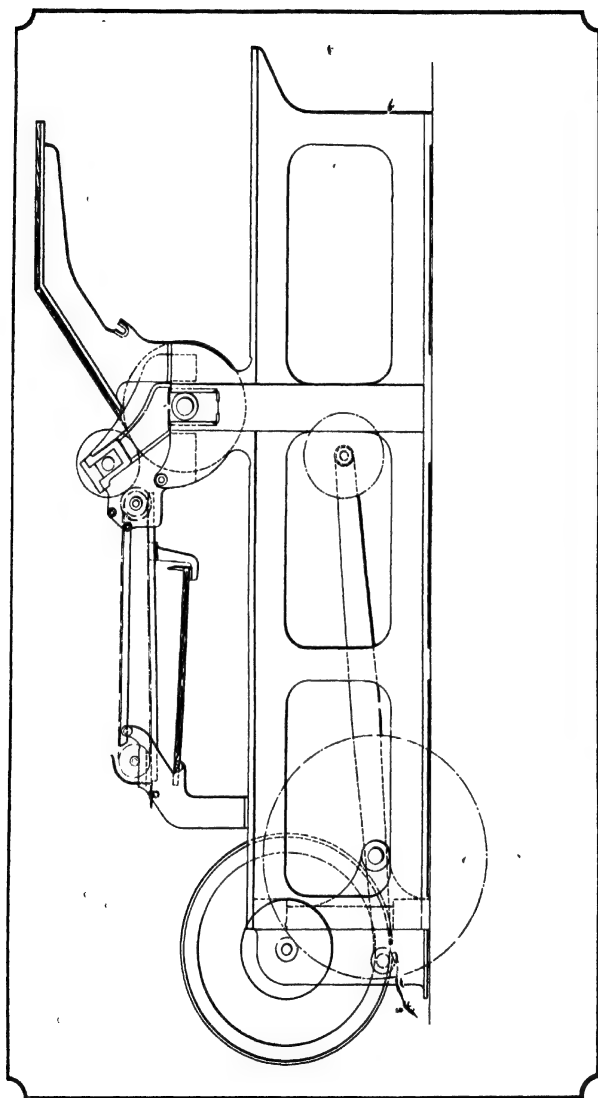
Flat-bed Offset Machine : Feeder's Side Elevation.
